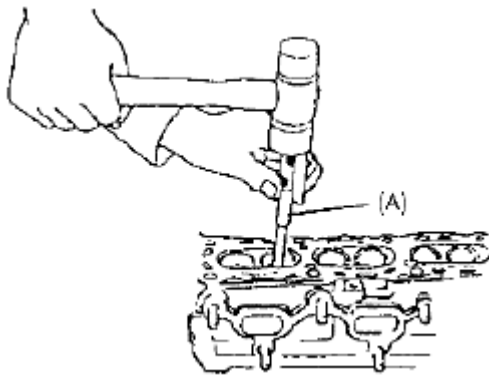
Driving Valve Guide Out From Combustion Chamber Side To Valve Spring Side
